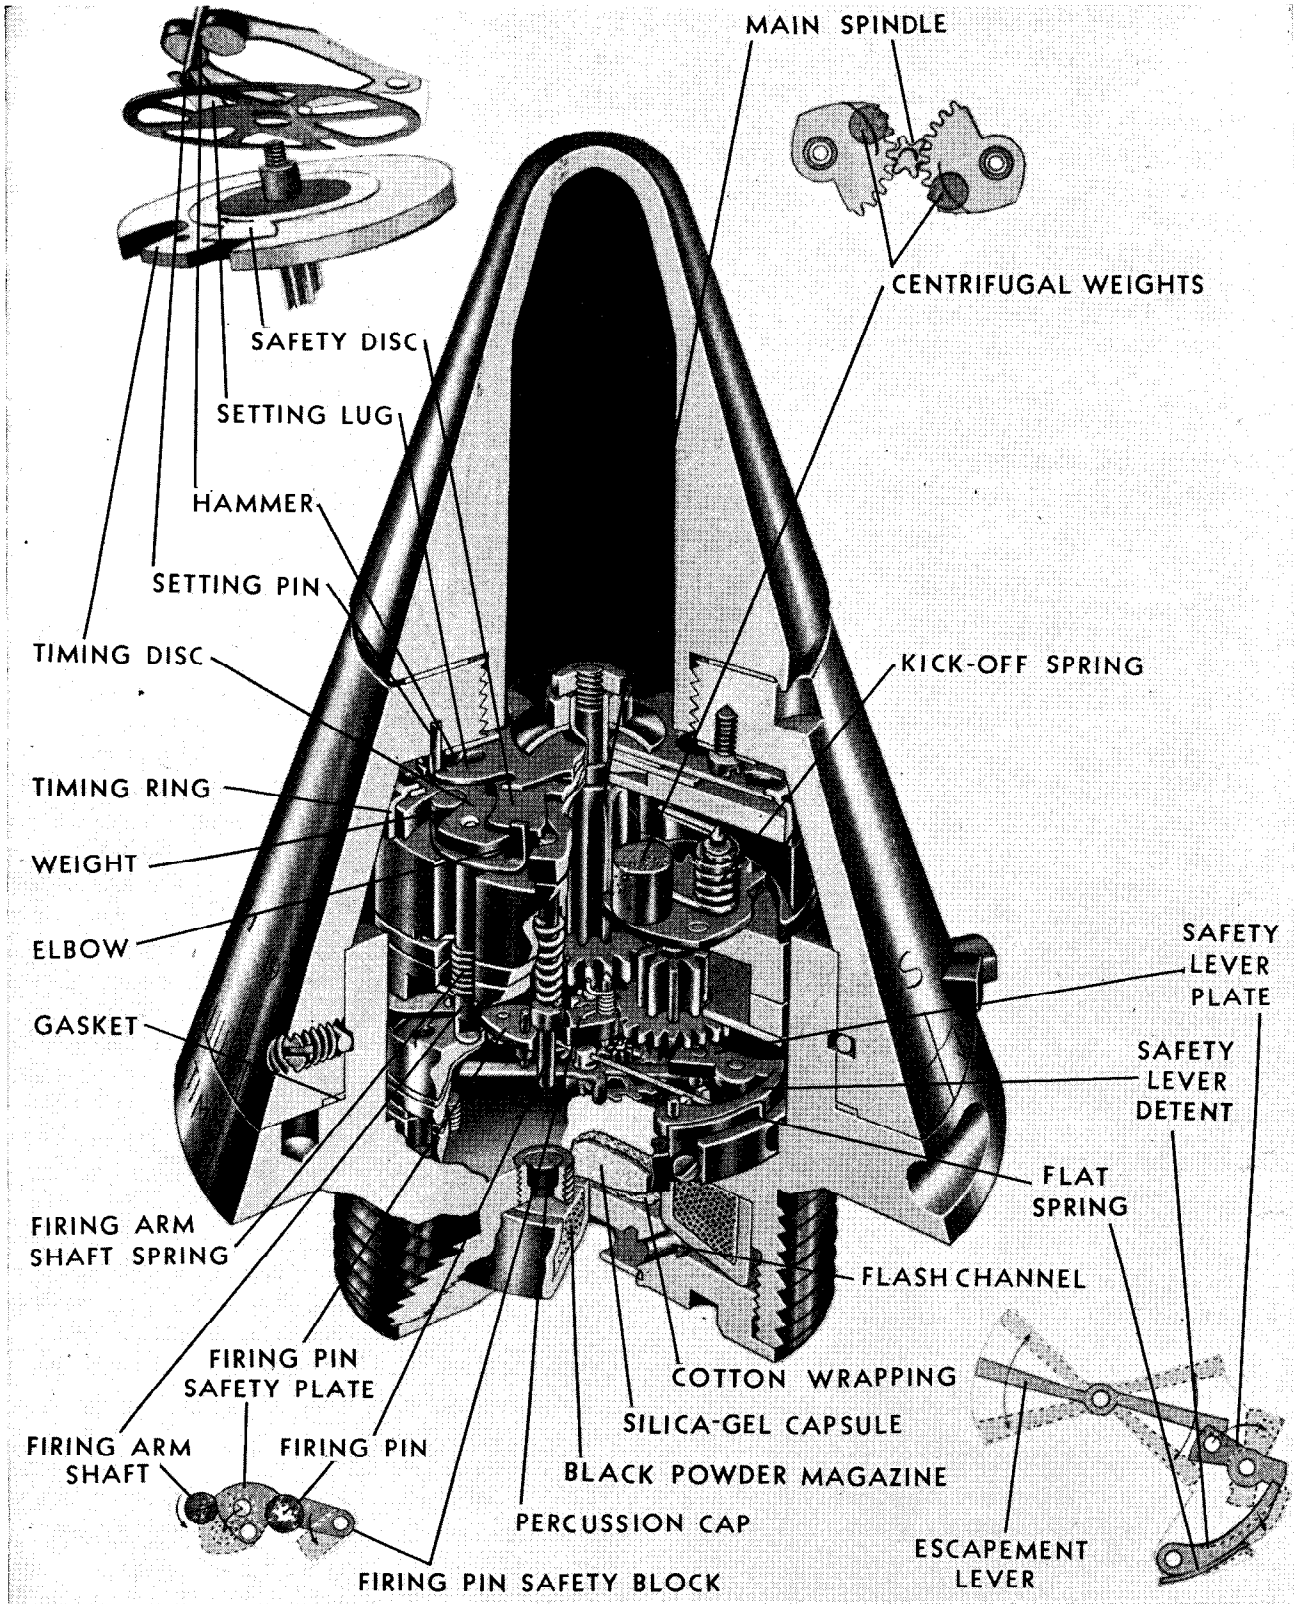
Mechanical Time Fuze Mk 61 Mod 0—Cutaway
